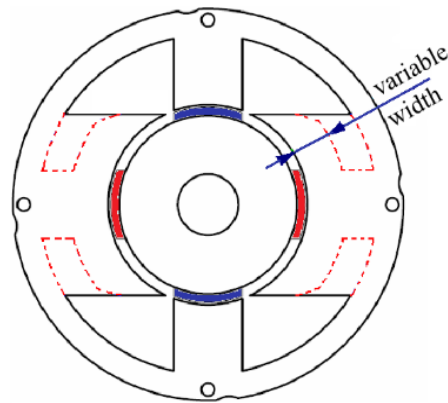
Designing and shaping the stator poles of PM BLDC motor
